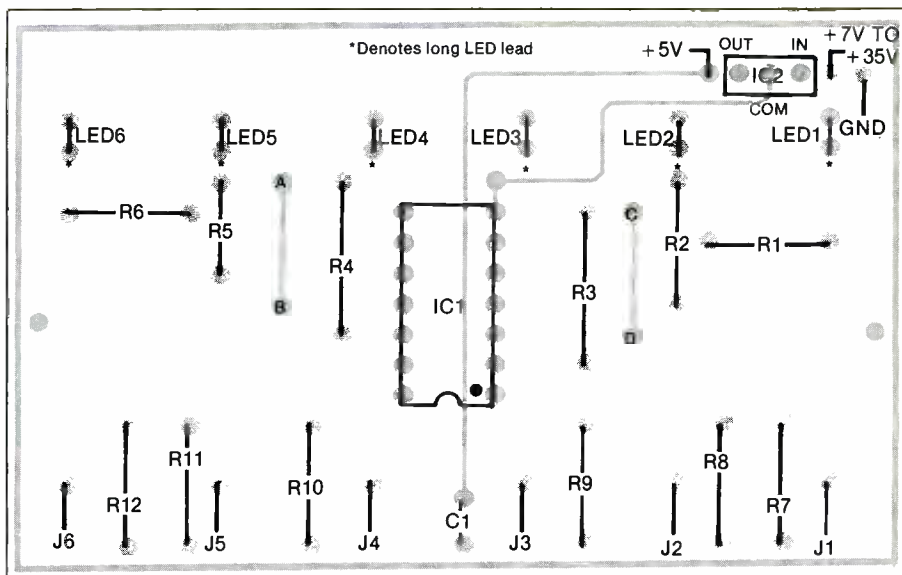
Wiring guide for pc board. Use this as a rough guide to component locations and layout if project is assembled on perforated board.
